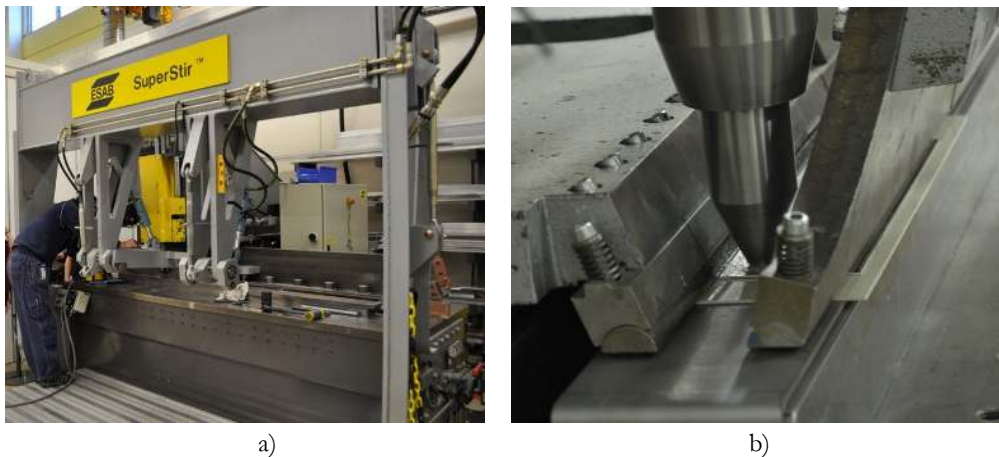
Schematic showing ESAB SuperStir™ machine. a) ESAB SuperStir™ machine
